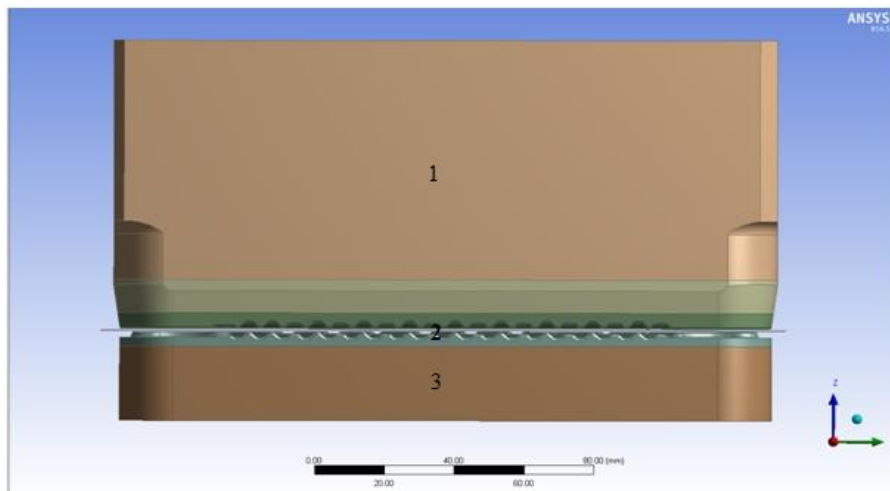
1 Schematic illustration of a die forming process (1: upper die, 2: workpiece 3: lower die) After [3].
